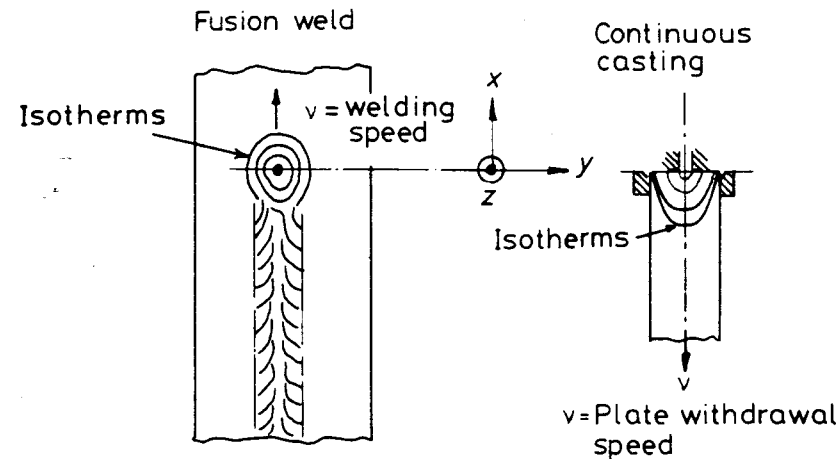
Illustrating the essential equivalence of isotherms about the heat sources in fusion welding and continuous casting.
